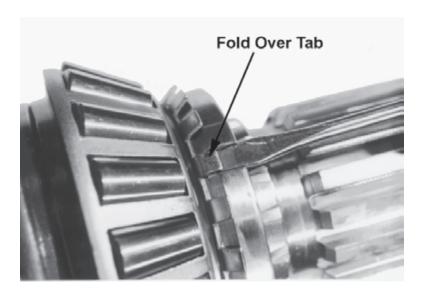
Bending Fold-Over Tab to Remove Lock Nut
